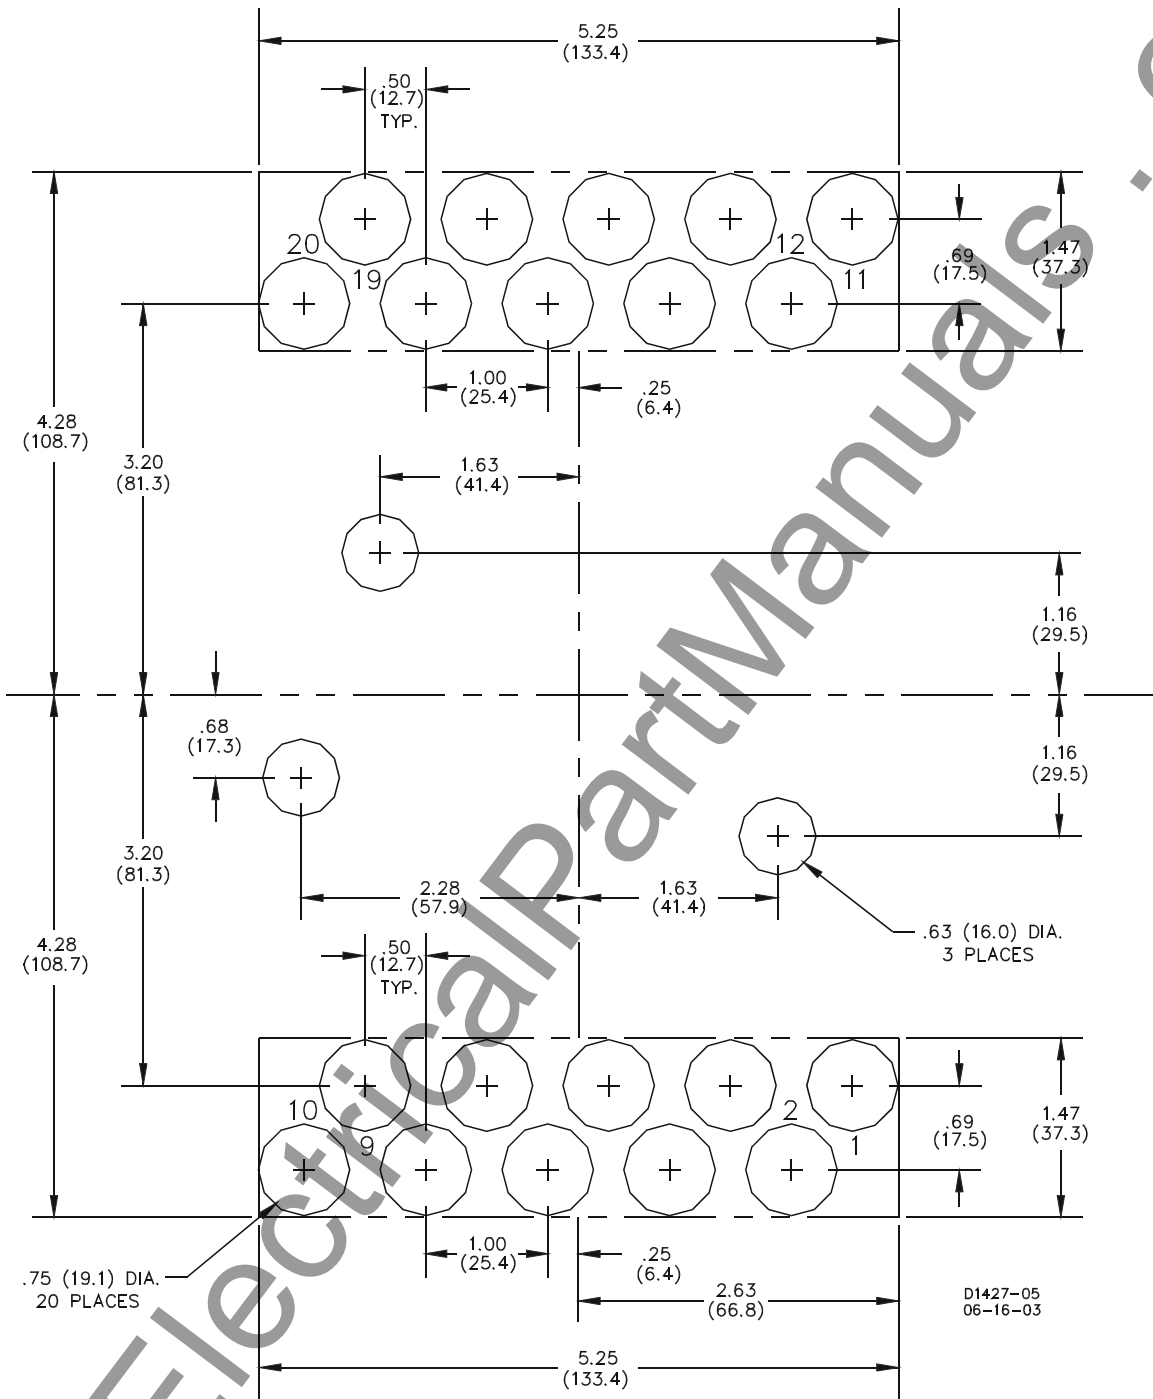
S1 Case, Panel Cutting/Drilling Diagram, Projection Mounting, Rear View
